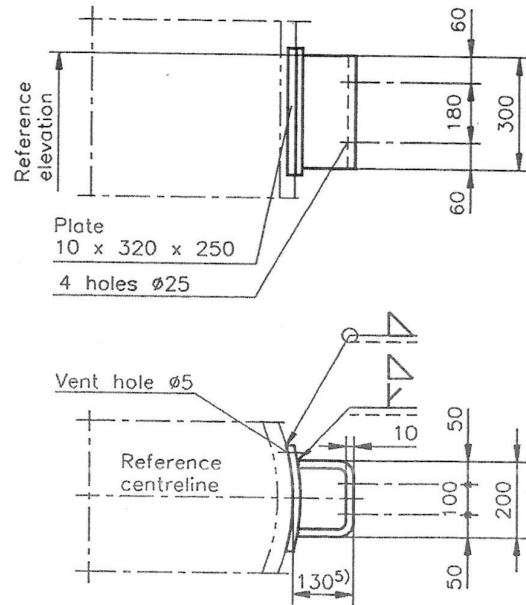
Clip, type 2E, welded to vessels with cold insulation
